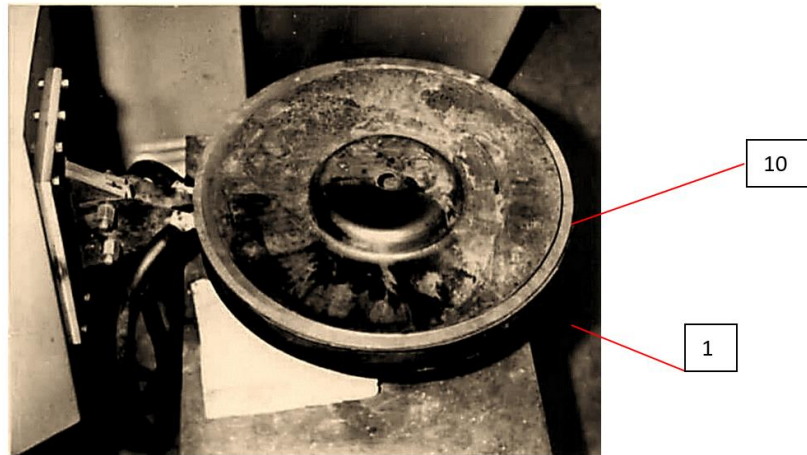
The design of a thin shaped solid disk: 1 – bottom plate; 10 – solid disk
